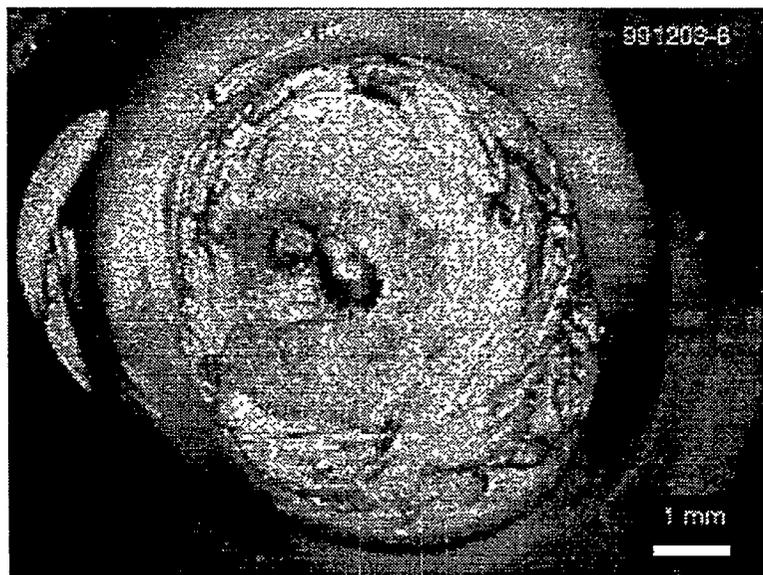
Fractography of torque tested weld (test No. 991203-6) revealing a ductile fracture surface and total bonded area.
